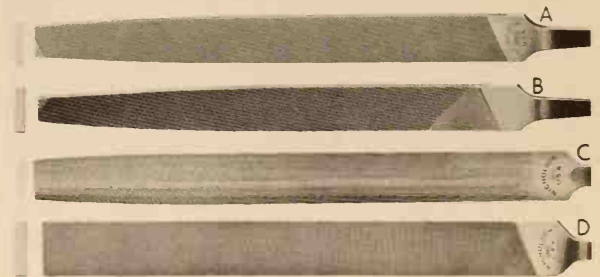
Machinists' files: (A) Mill file; single cut, used for draw filing and finishing; (B) Flat file; double cut, for general work; (C) Half round file; double cut, used to file curved surfaces; (D) Hand bastard file; double cut, for finishing flat surfaces--it also has one safe edge (without teeth).
